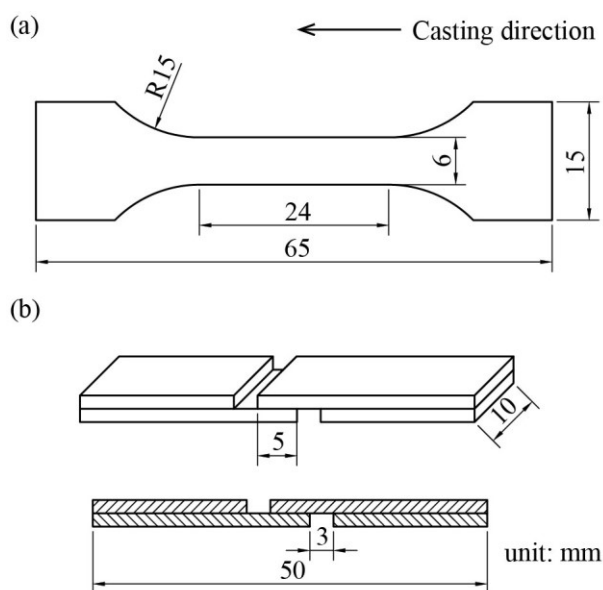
Dimensions of the specimens for the tensile and tensile shear tests
